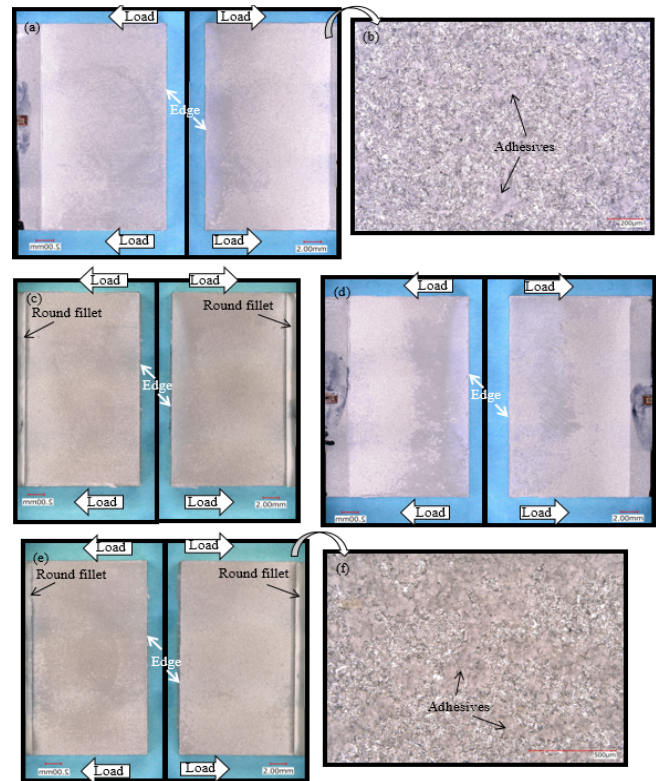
Fracture surfaces of (a), (c), (d), and (e) are taken from A , A_r , B , and B_r specimens, respectively. The fracture surfaces of (b) and (f) are enlarged views of (a) and (e), respectively.
